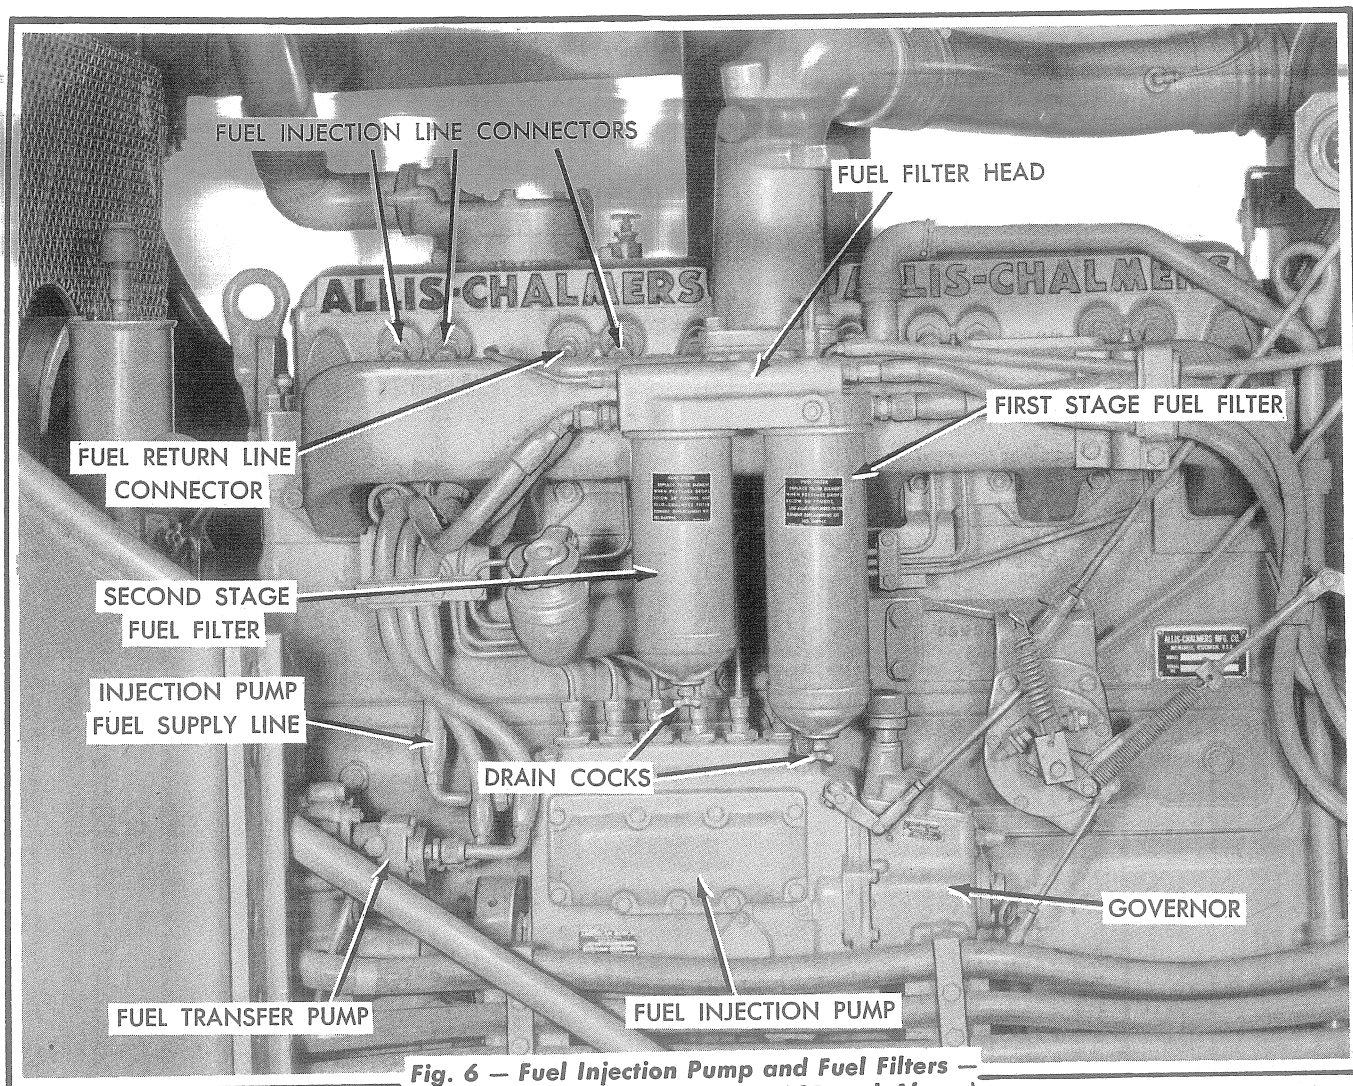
Fuel Injection Pump and Fuel Filters — Installed (Tractors Serial No. 4001 and Above)
